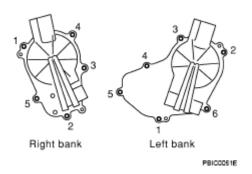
Identifying Intake Valve Timing Control Cover Mounting Bolts Tighten Sequence
